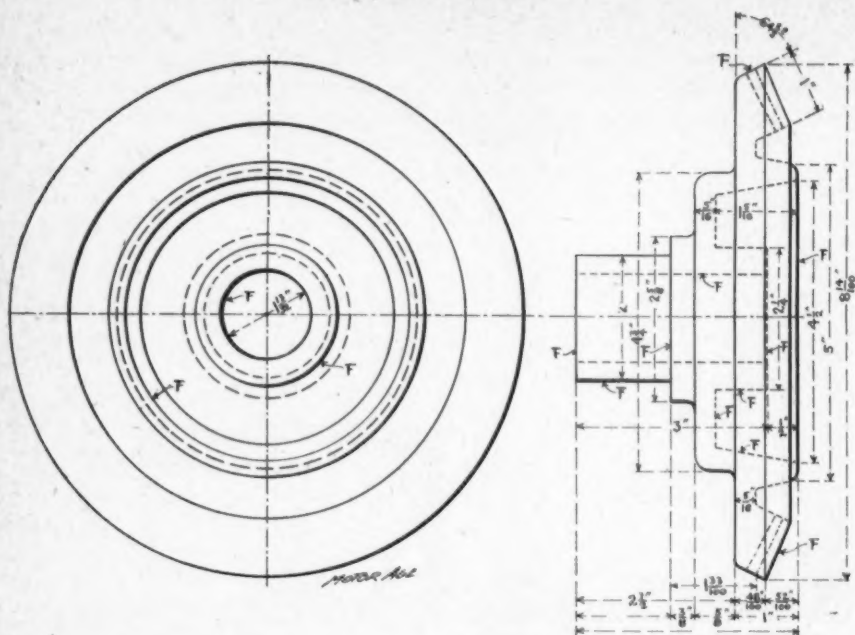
RIGHT HAND BEVEL GEAR BLANK (LEFT HAND IN FIG. 11).
